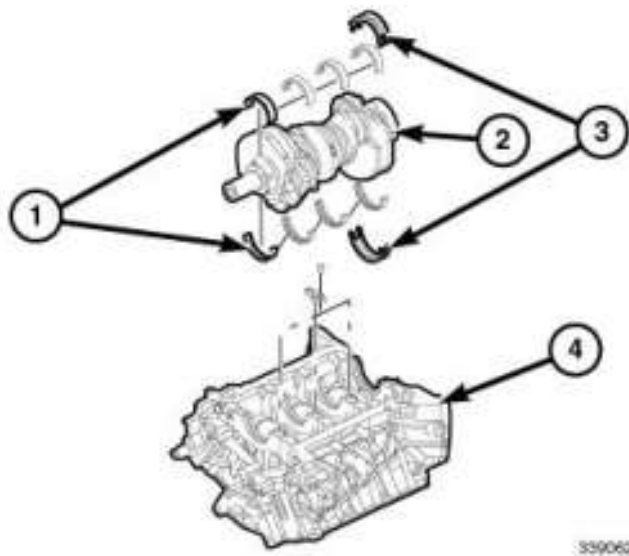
Crankshaft, Bearings, Thrust Bearing & Engine Block
